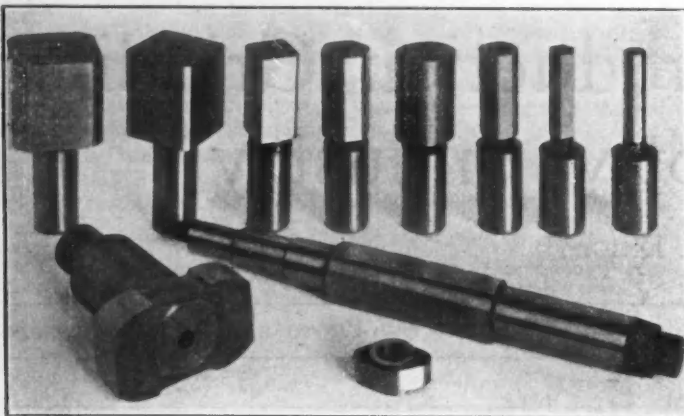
EXAMPLES OF THE WORK THAT IS DONE ON THE GRINDING MACHINE
